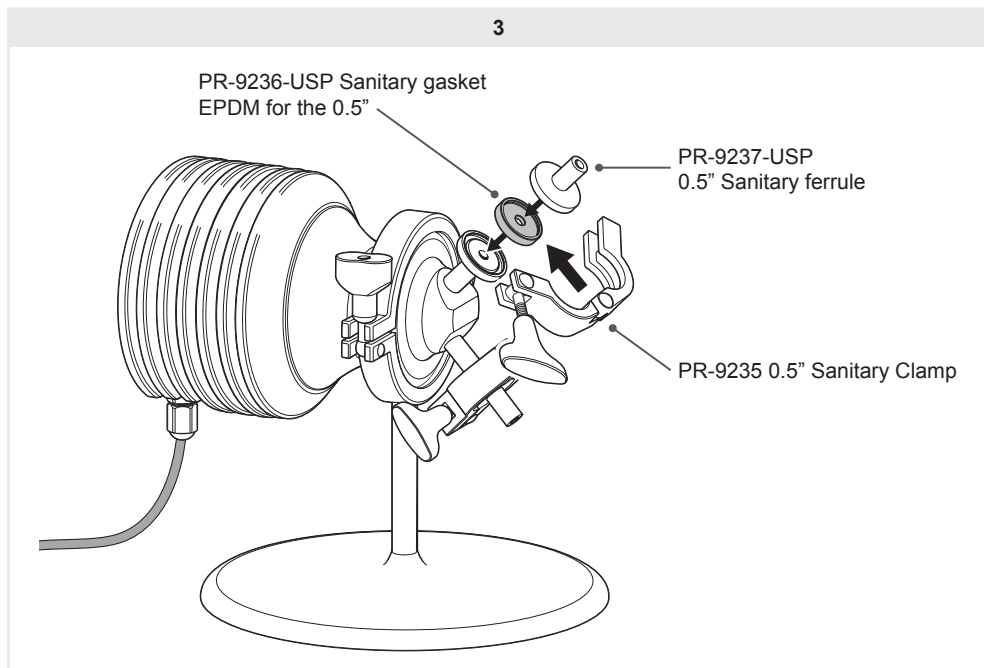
Refractometer assembly: Attaching the ferrules for the feed pipes.
